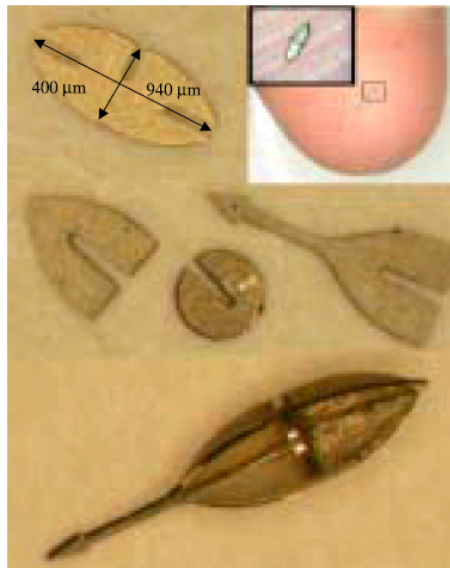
IRIS biomicrorobot platform with parts and final assembly [53].
